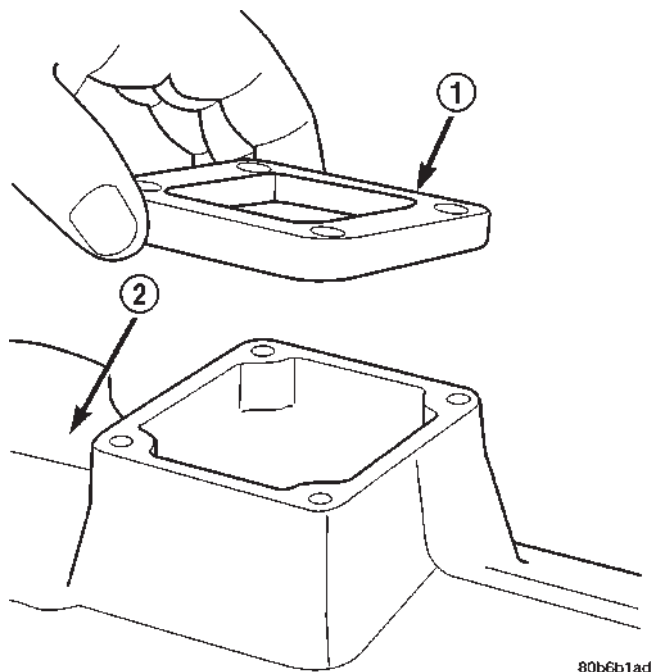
TRANSMISSION BUILD FIXTURE
